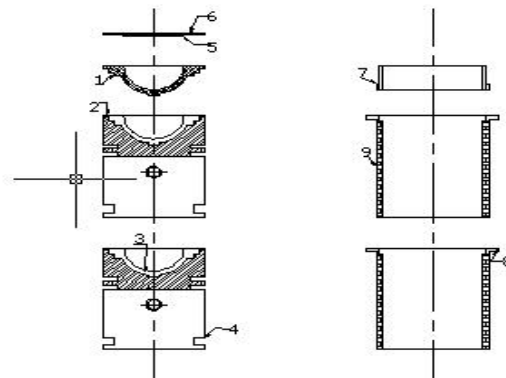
Assembly details of air gap insulated piston, air gap insulated liner and ceramic coated cylinder head
